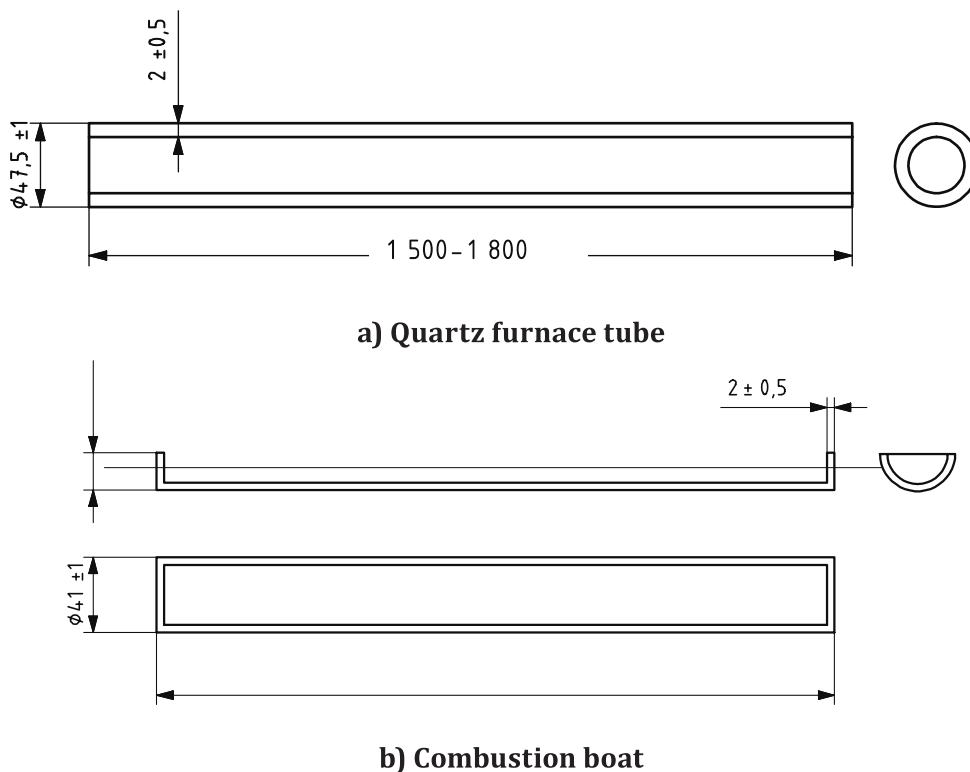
Dimensions of a suitable quartz furnace tube and combustion boat
